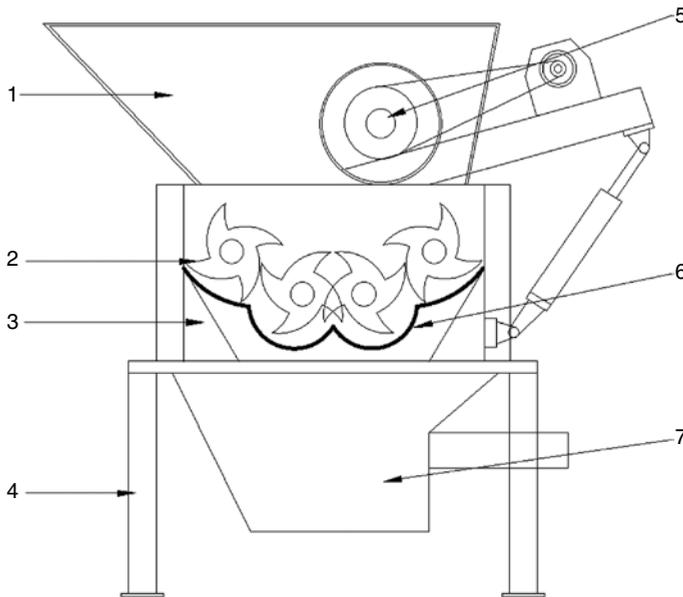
Four-shaft shredder. 1 – Feeding hopper; 2 – knife roll assembly; 3 – crushing chamber; 4 – the frame body; 5 – drive device; 6 – screen; 7 – the hopper.
